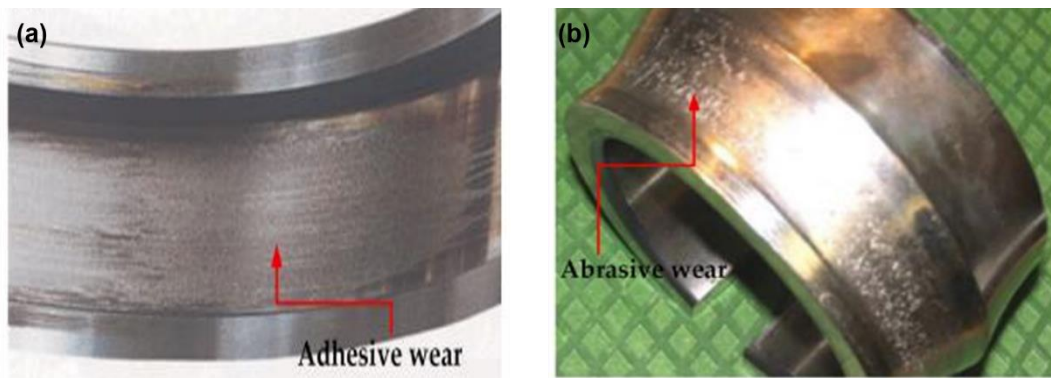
Wind turbine bearing wear types (Adapted from [111]), (a) adhesive wear failure; (b) abrasive wear failure.
